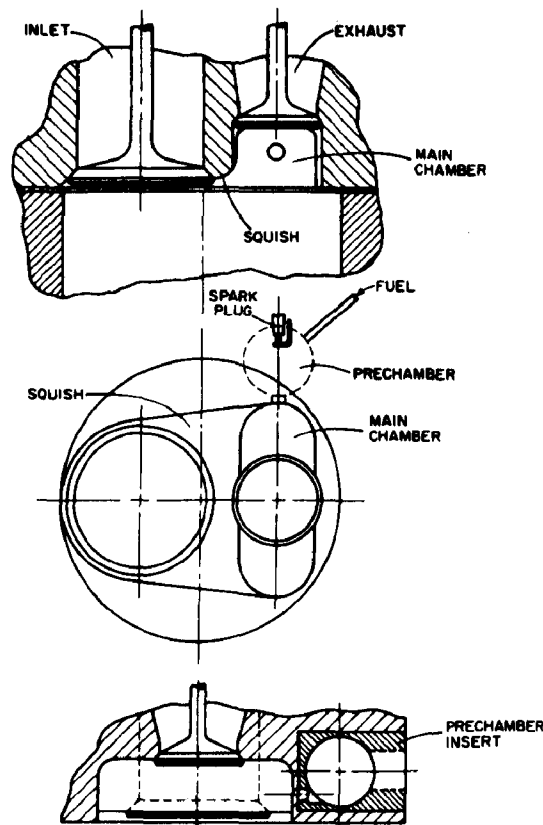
Clawson prechamber design (Ref. 4-28)
